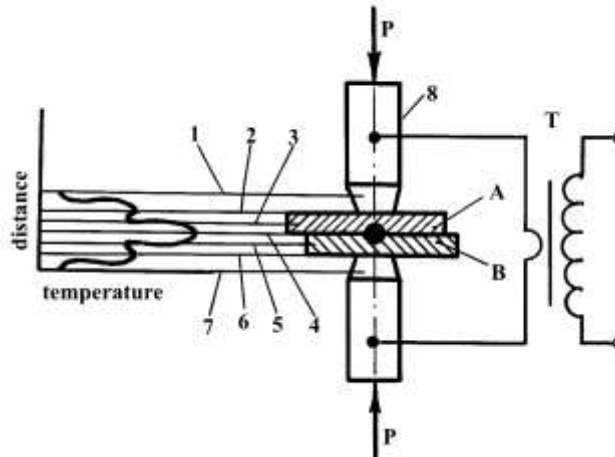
Scheme of spot welding: 1...7 – resistance and temperature zones; 8 – electrode; A, B – parts to be welded; T – electrical transformer; P – compressing forces
